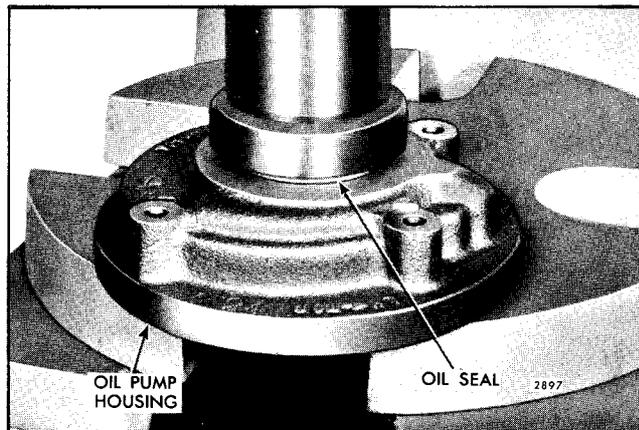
Installing Oil Seal in Oil Pump Housing
